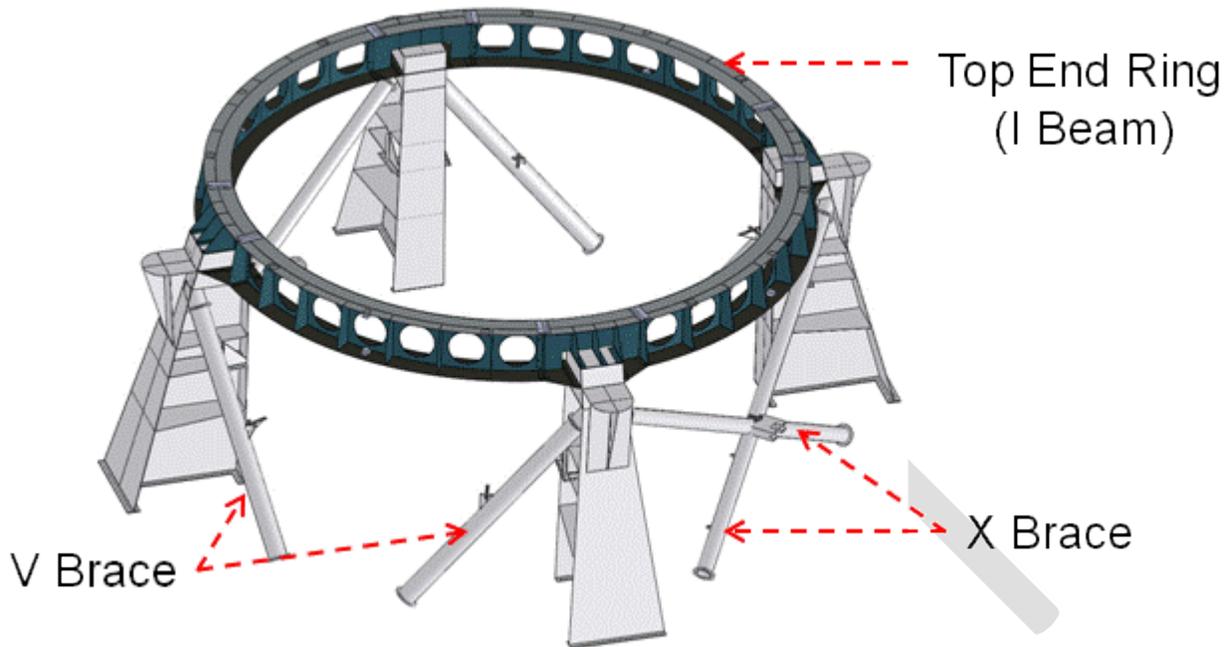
Top End Assembly Structure, TEA Ring, TEA Piers and TEA Braces.
